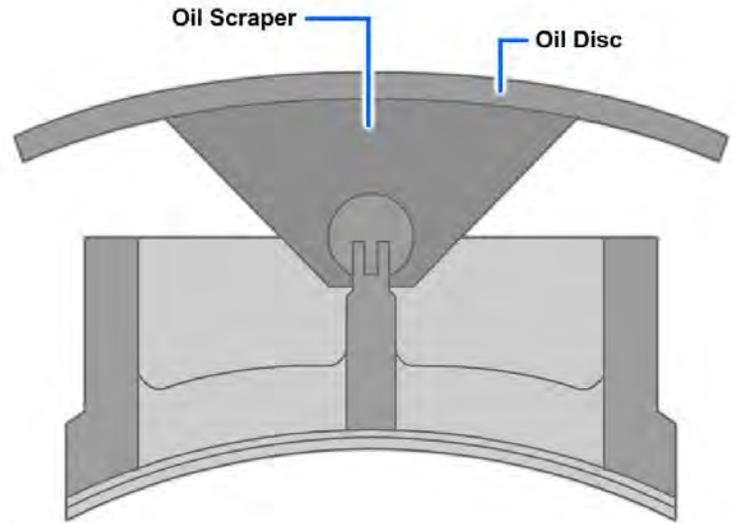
Disc-oiled line shaft bearing scraper arrangement.
